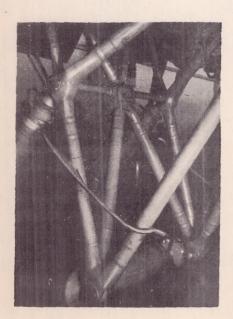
Section of landing gear of Fw200 "Condor" with welded heat-treated framework struts.
